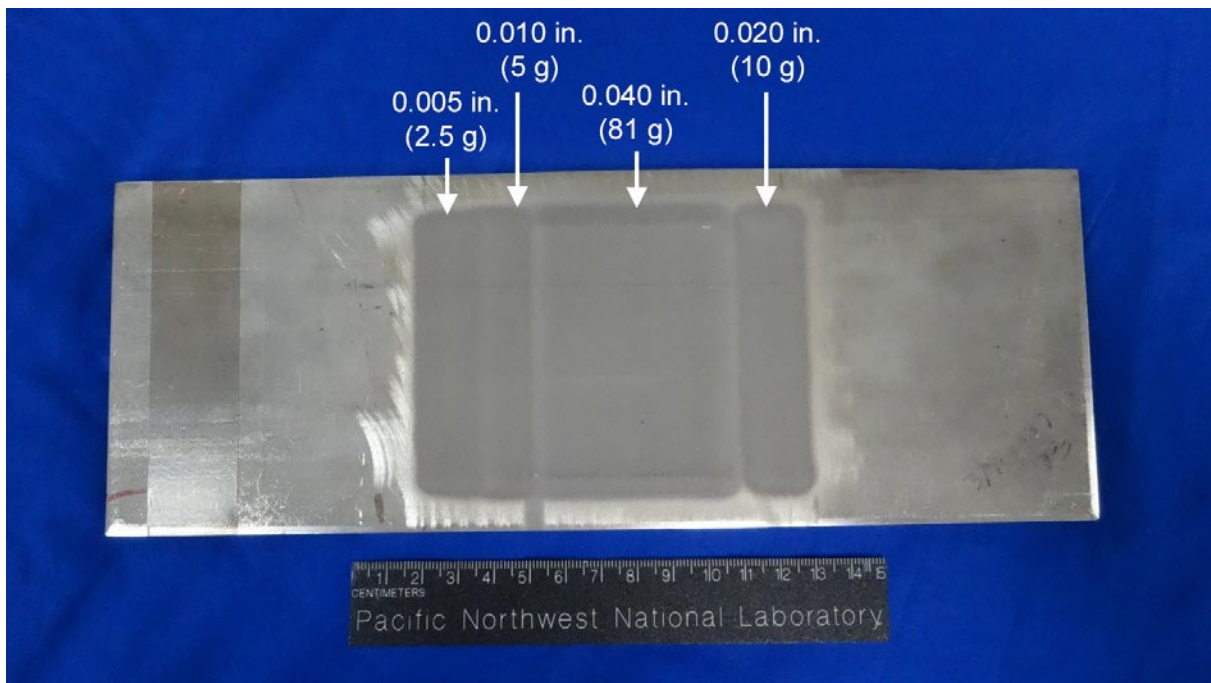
Stainless Steel Subsurface Flaw Plate Top Side with Four Different Inconel Cold Spray Layer Thicknesses. The thickness of each layer is given along with the amount of cold spray applied to the surface during fabrication.
